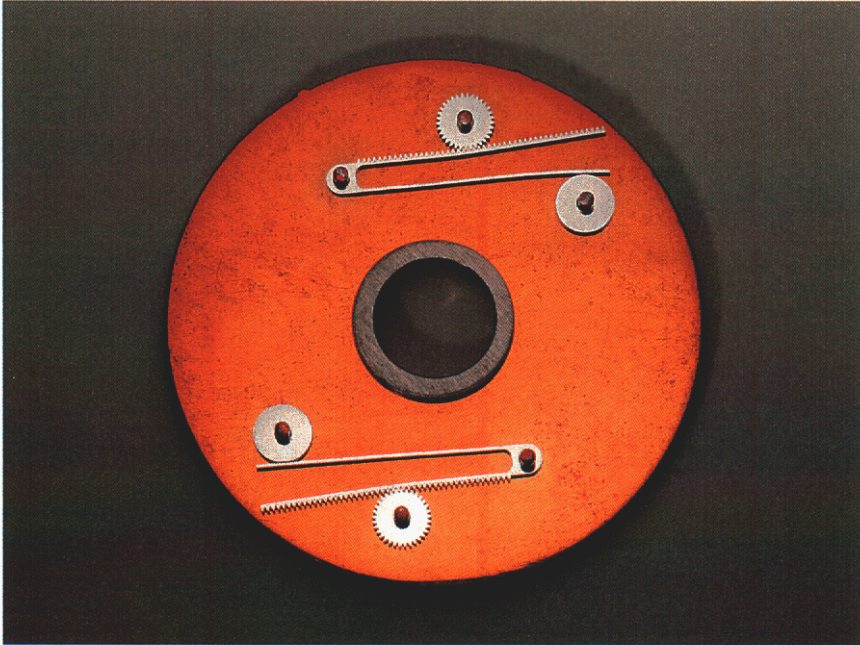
Close-up view of gear / u-spring / washer positioning used in dormancy testing.
